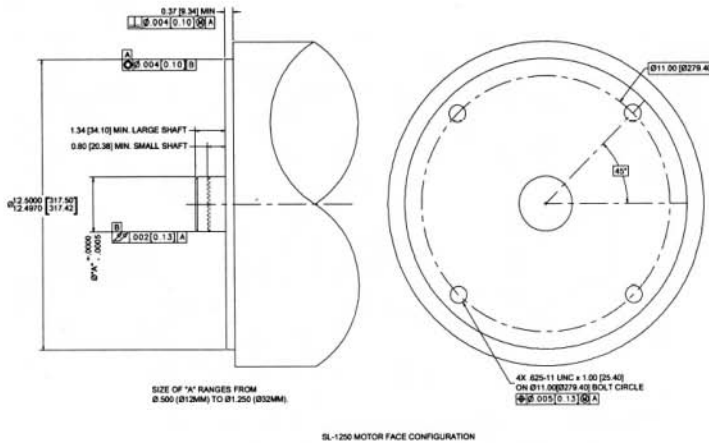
Typical 12.5-Inch Diameter Type C-Face Mounting Surface
